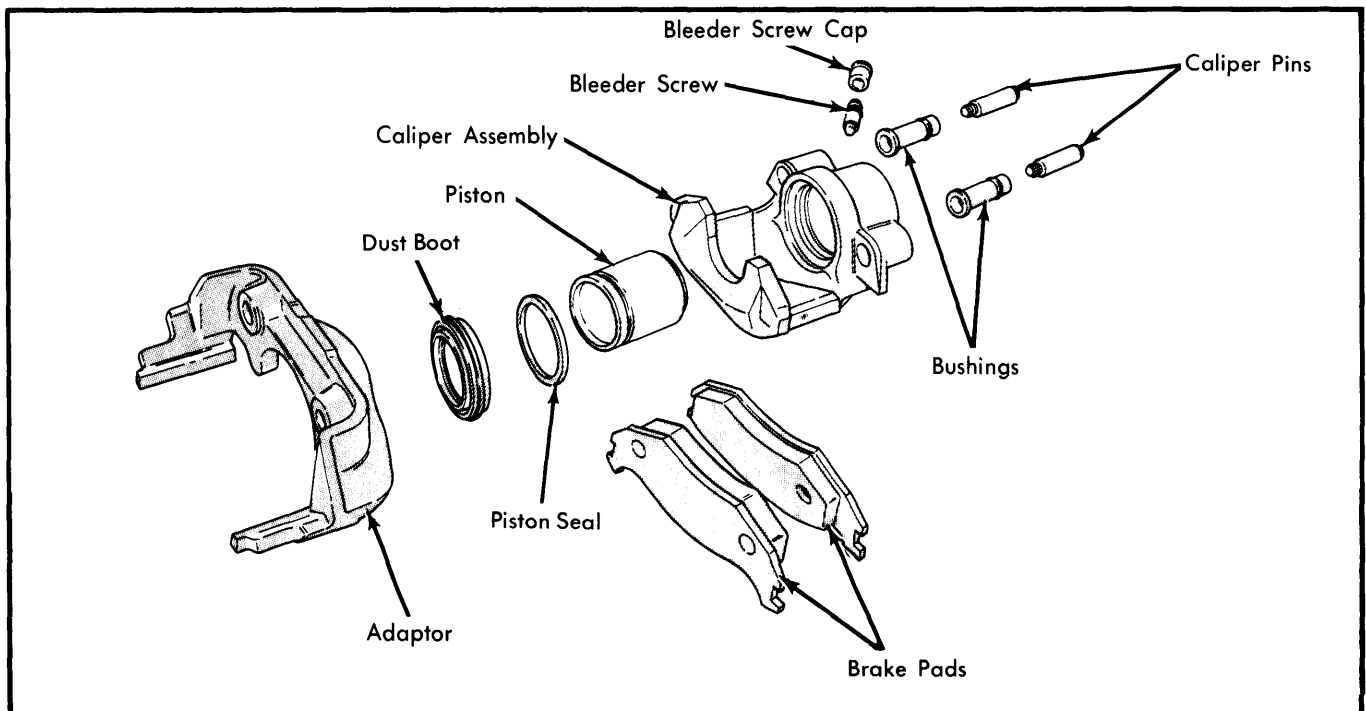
Exploded View of Floating Caliper Assembly (Omni and Horizon Only)
